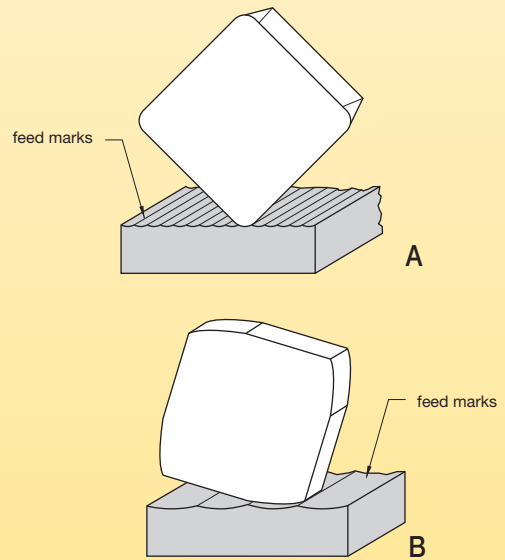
Feed marks produced with a nose radius insert (A) compared to marks produced with a wiper insert (B).
